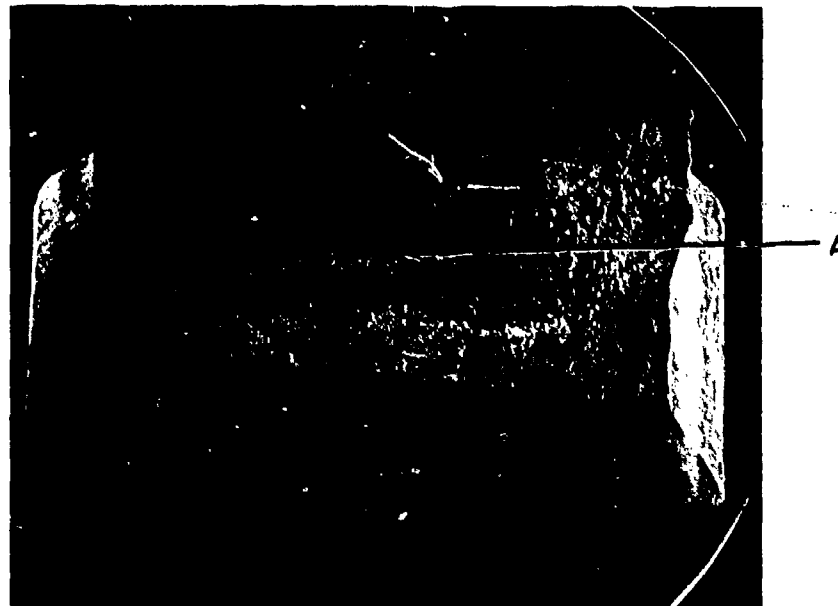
Tensile fracture surface of an A-514 steel plate specimen, 8x.
